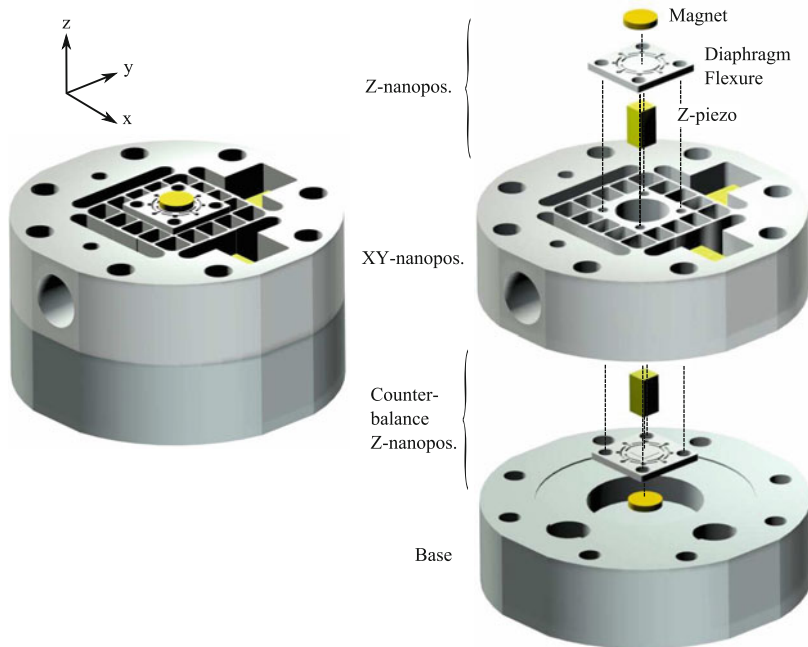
Assembled and exploded views of the z-nanopositioner design
